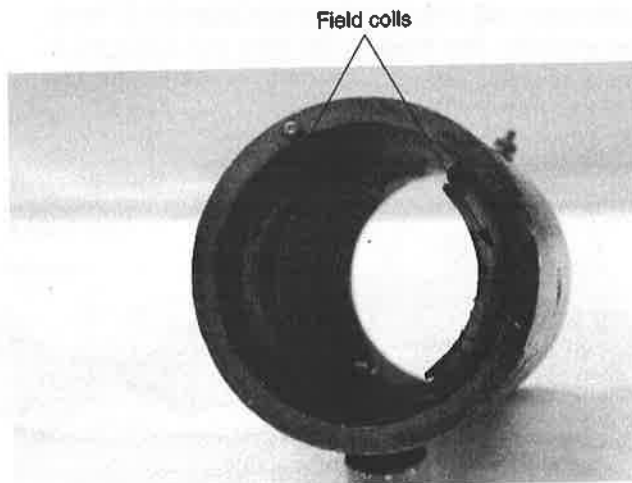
Generator field assembly; mounted inside generator housing.
